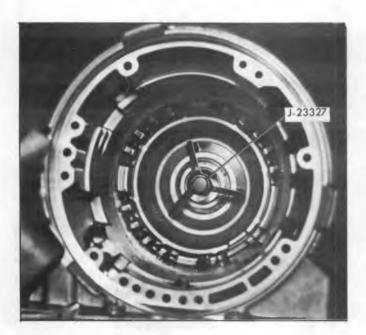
M--Compressing Low and Reverse Clutch Piston Spring
